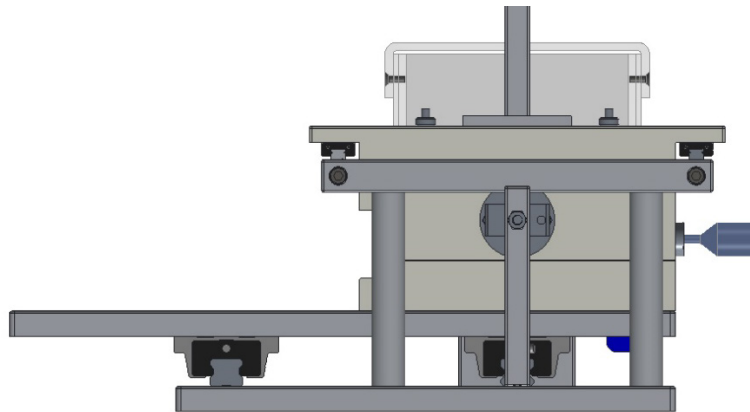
Design plan - lateral view. The linear guides and sliding blocks engagements are visible.
